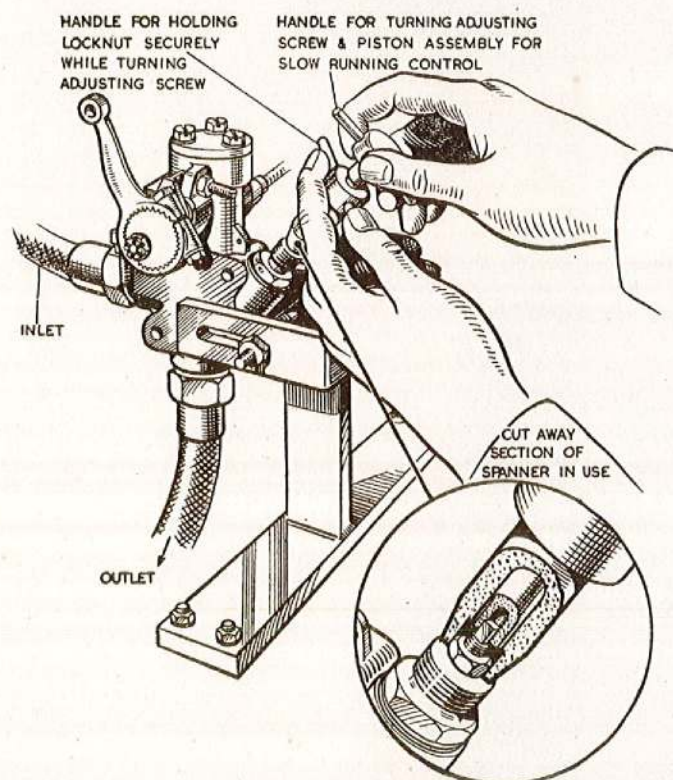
View showing use of special adjusting spanner T.154353 for adjusting the slow-running screw and piston assembly
